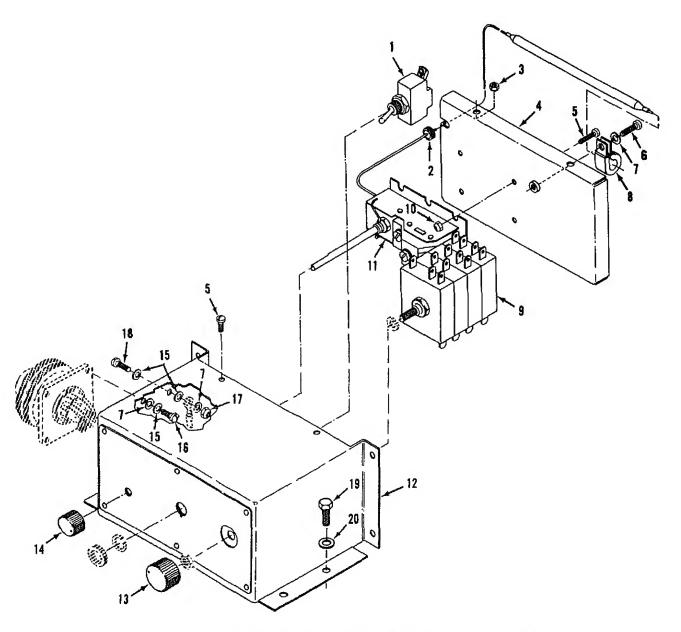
Control Panel Assembly TM5-4120-339-24P/5
